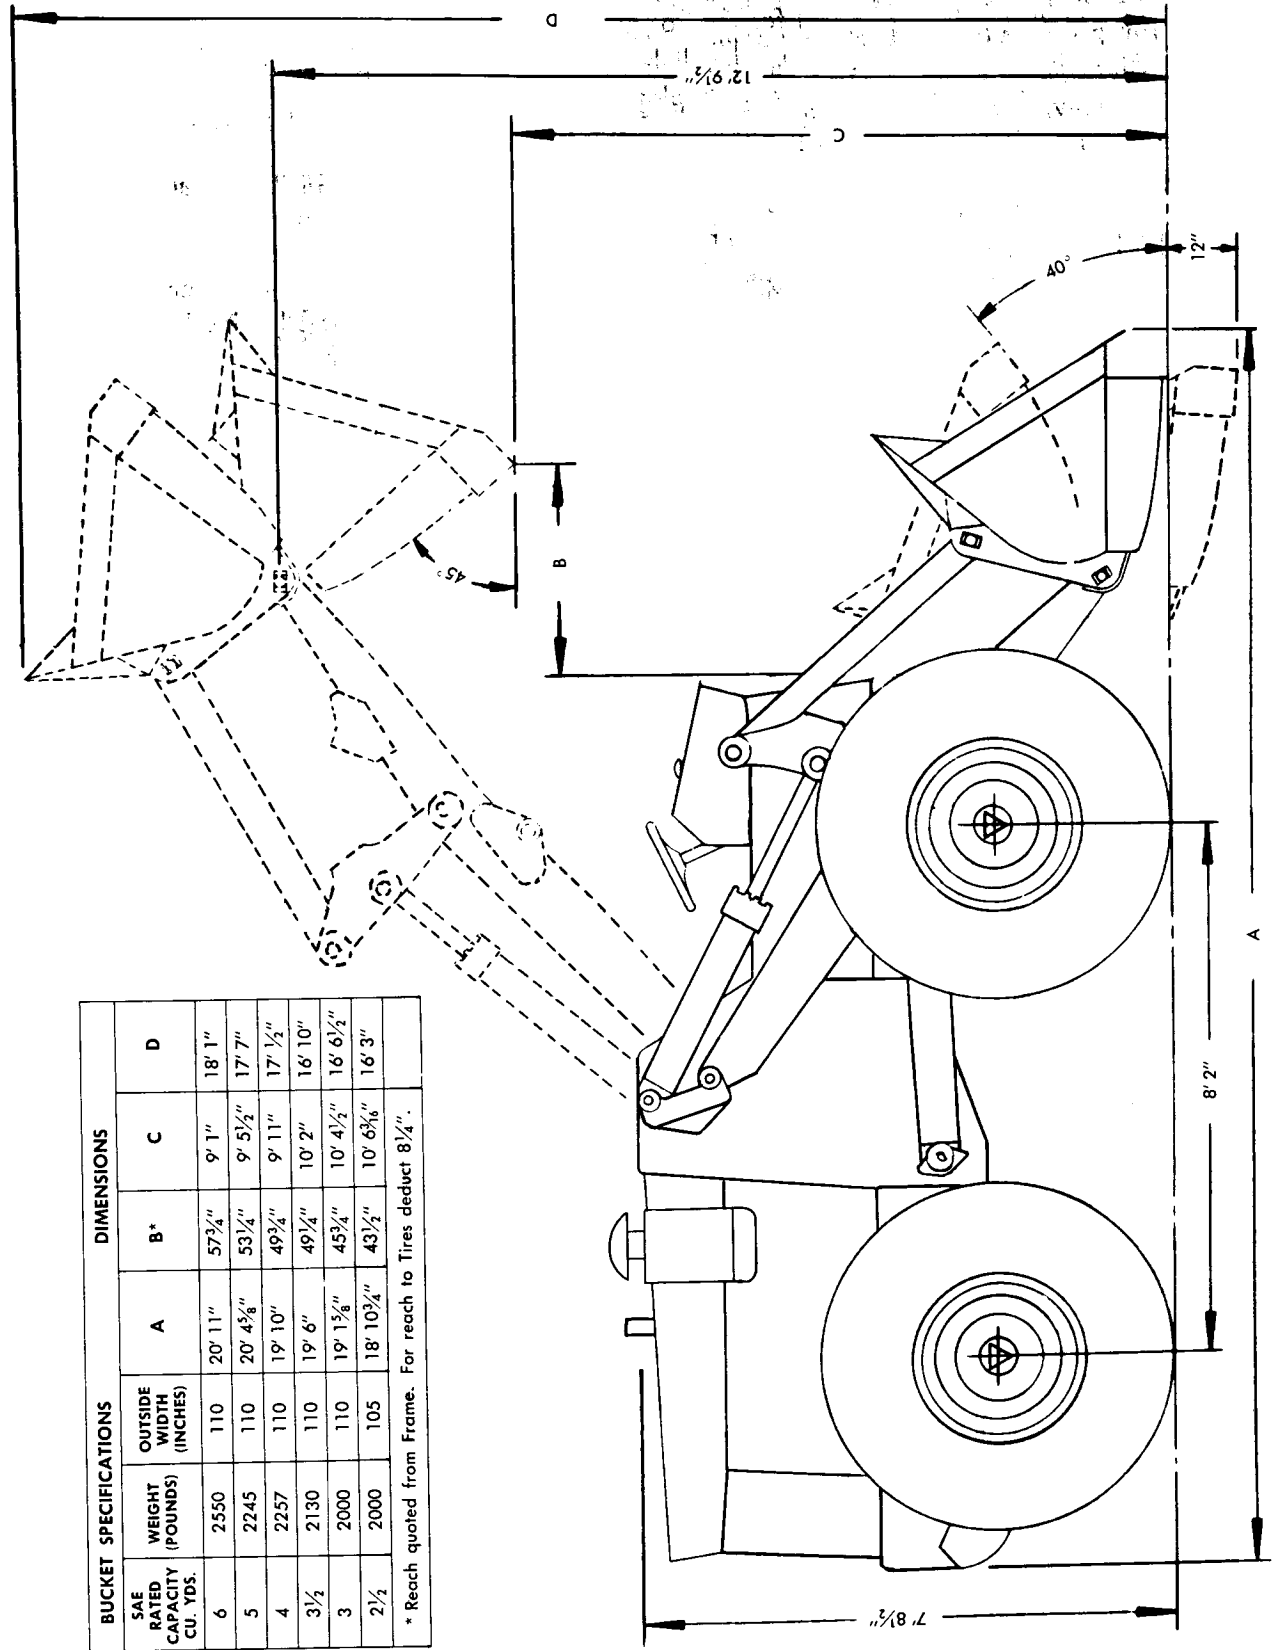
Loader Dimensions (General Purpose Bucket)
